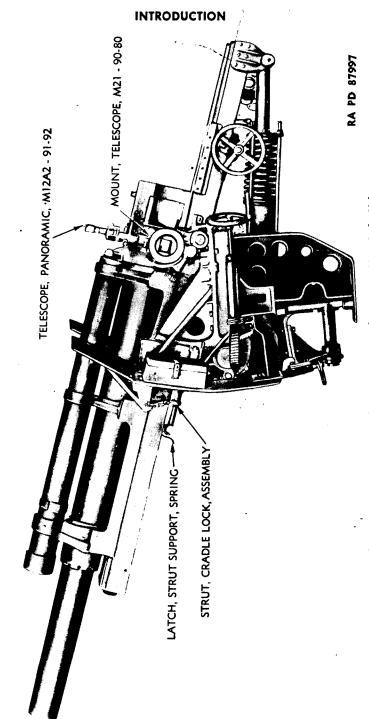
105-mm Howitzer M2A1 and Mount M3 - Left Side
